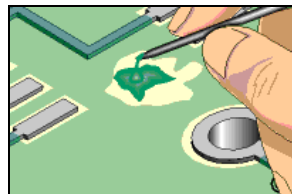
Epoxy can be applied with a Plastic Probe or Mixing Stick sharpened at the end.
